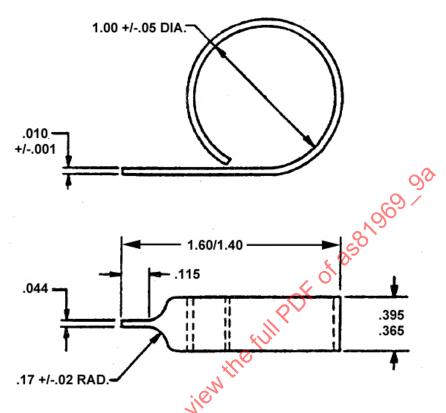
TOOL CONFIGURATION AND DIMENSIONS
